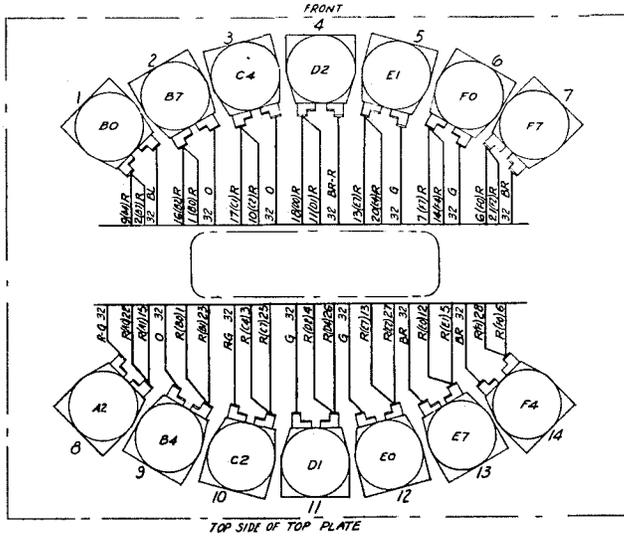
KS-13882 L1 Perforator — Wiring Diagram
